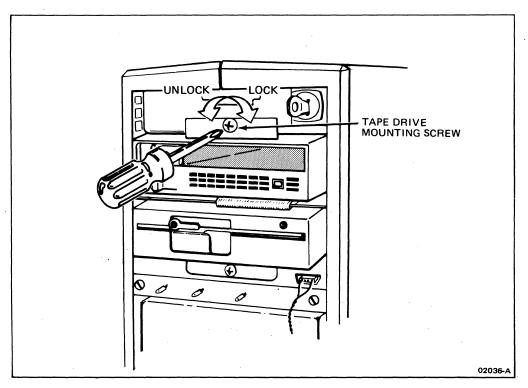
Locking/Unlocking the Tape Drive Mounting Screw
